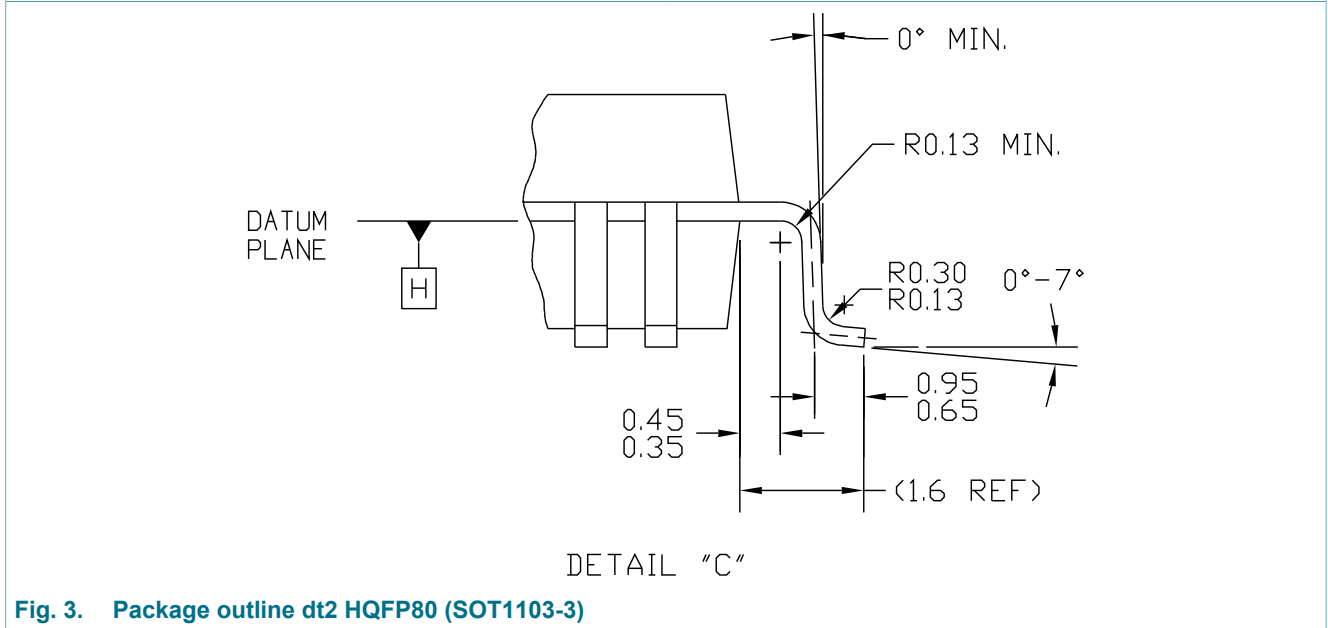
Package outline dt2 HQFP80 (SOT1103-3)
